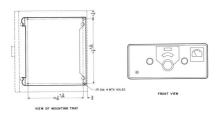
51S-1/1A Receiver, Outline and Mounting Dimensions
